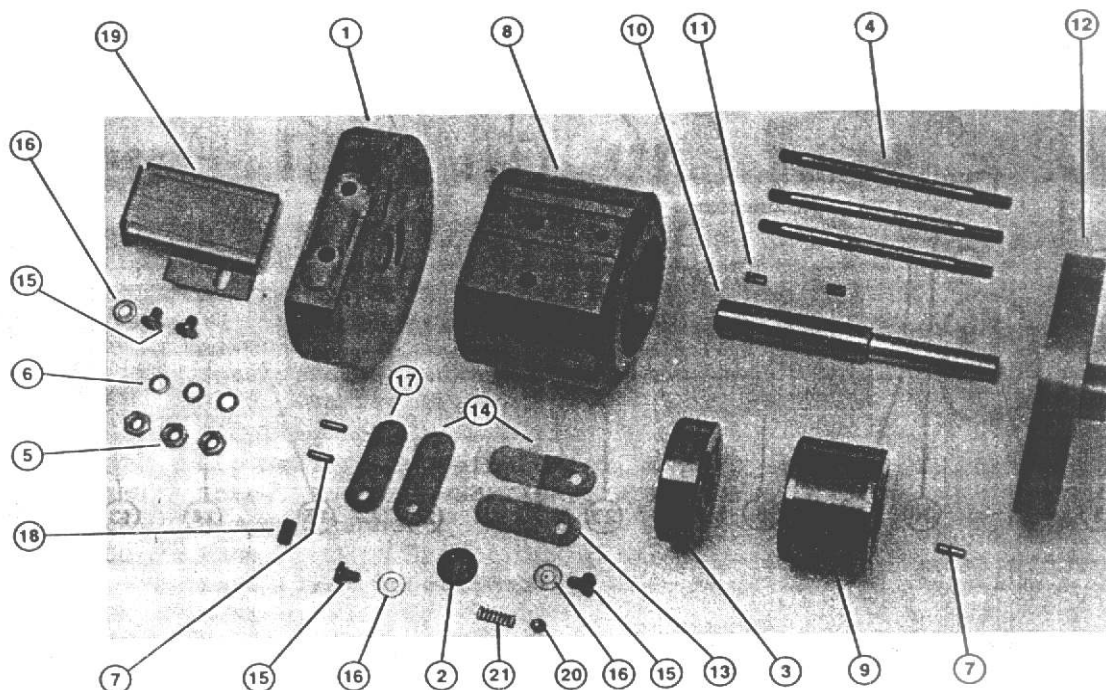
Exploded View for Part No. 61-1003C Modular Pump Assembly.
